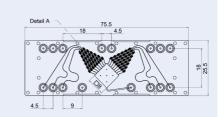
Detailed schematic drawing of 2D Gradient Generator Fluidic 1166 with Mini Luer interfaces
